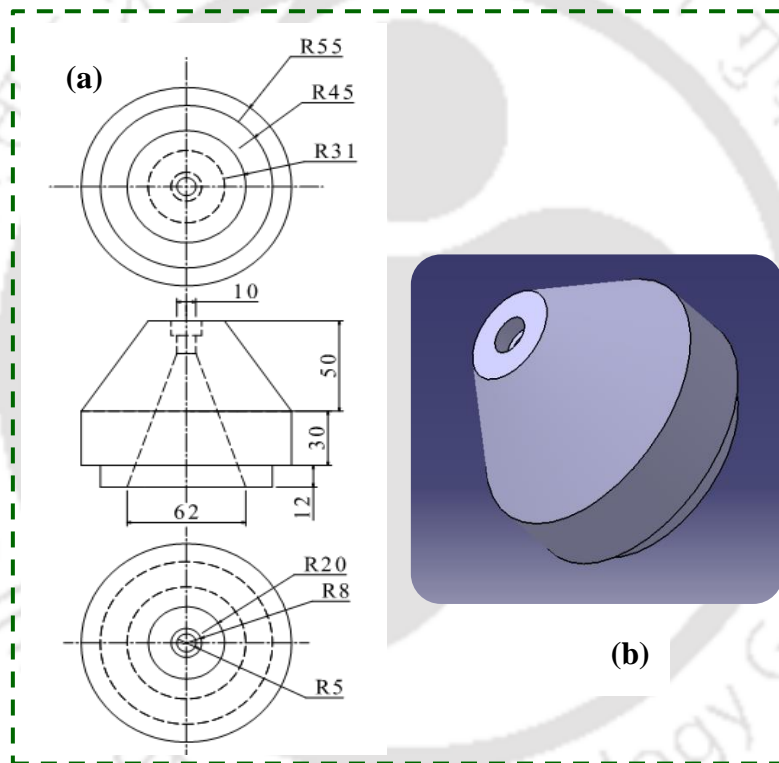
(a) 2-D drawing of workpiece fixture with dimensions (b) 3-D model of workpiece fixture (All dimensions are in mm).
